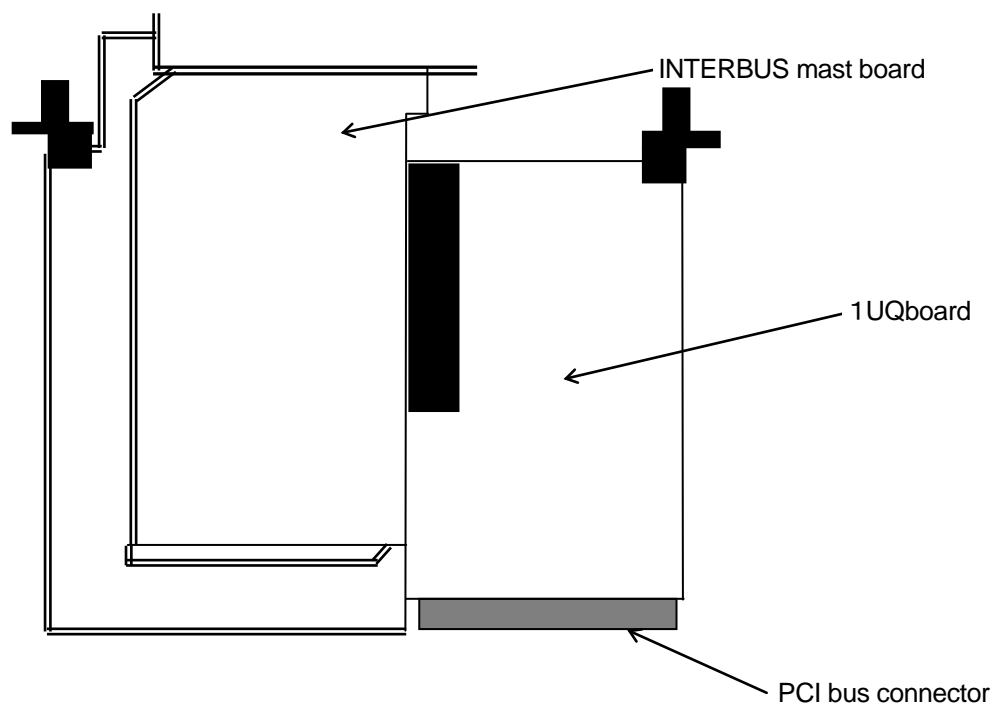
Interface board with INTERBUS master and PCI bus mother board connected (Front view)
